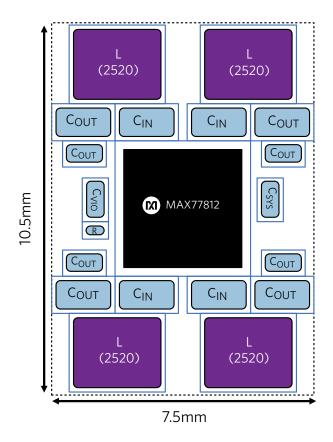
Small -Size PCB 2 + 1 + 1 Buck Converter (78.75mm<sup>2</sup>)
